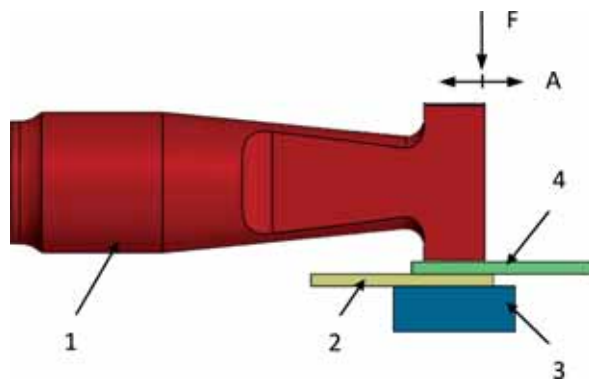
Scheme of principle for ultrasonic welding:
